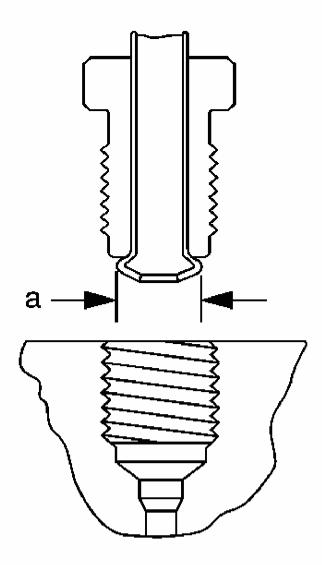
Inspecting Brake Pipe Flare Diameter Courtesy of GENERAL MOTORS CORP.
